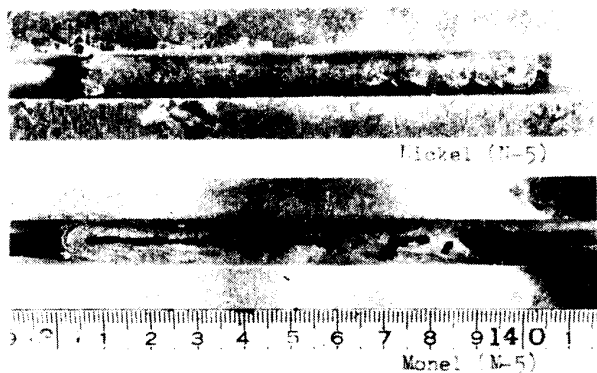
Example of weld crack in Nickel and Monel weld metals.
